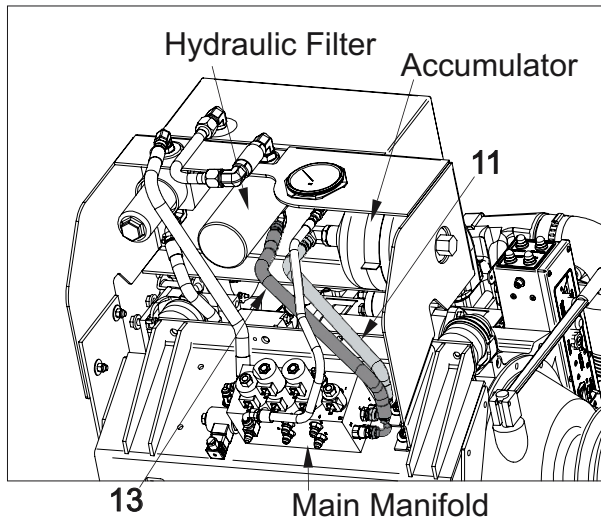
Install Accumulator and Hydraulic Filter Hose
